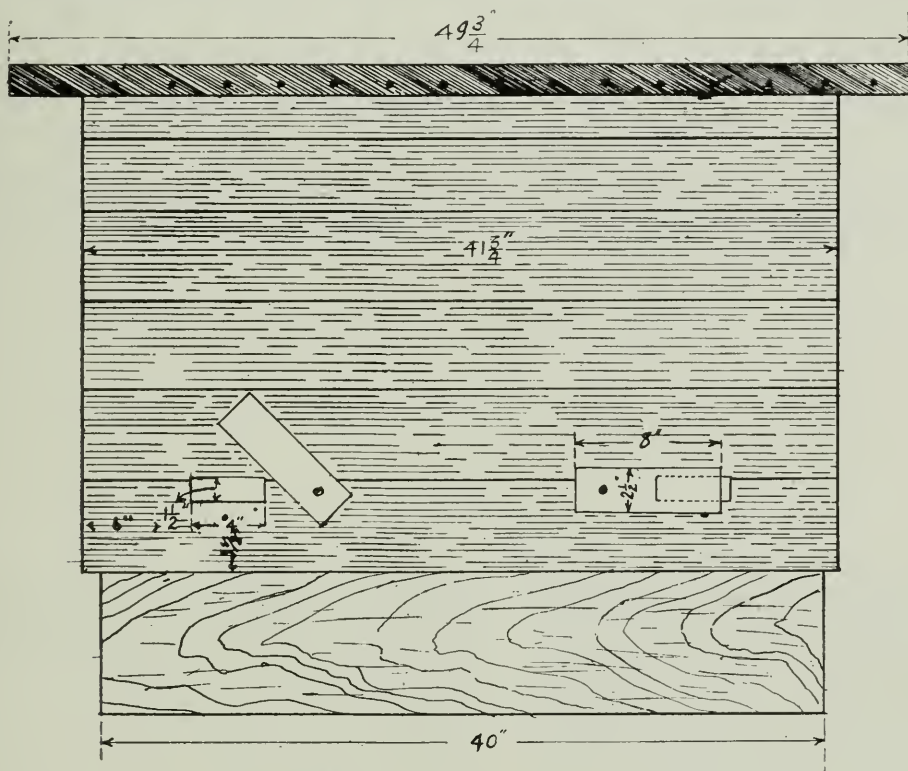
End Elevation of 4-Hive Wintering Box, showing arrangement of Entrances.
